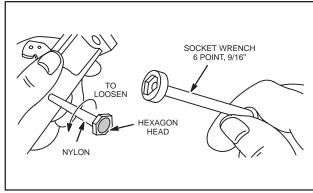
INSTALLING FUEL PICK-UP TUBE, TYPICAL
